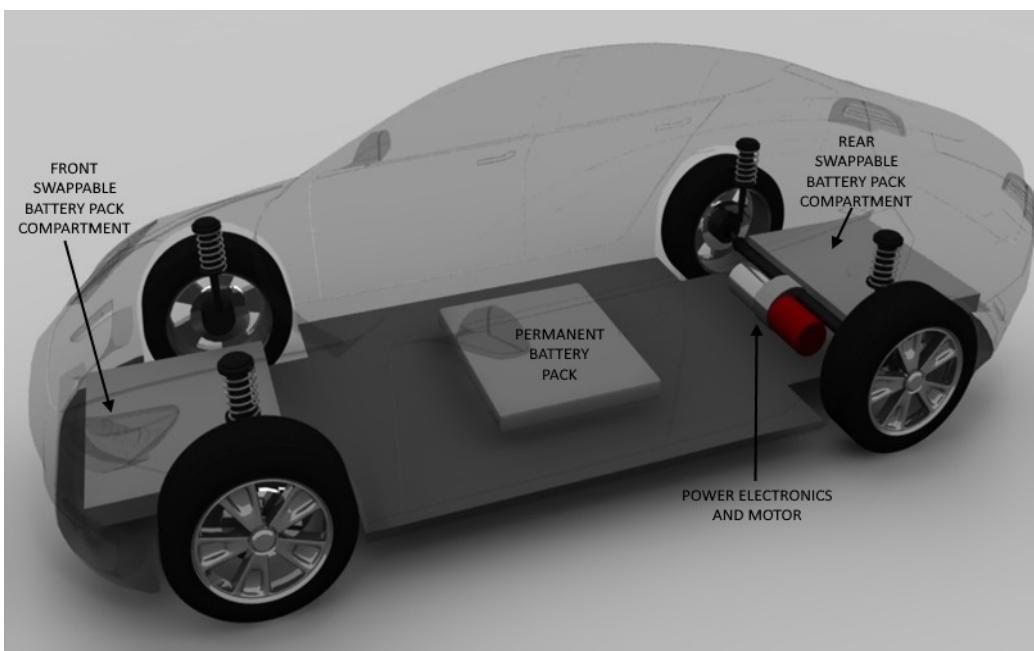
Battery equipment arrangement in a rear-wheel drive vehicle
